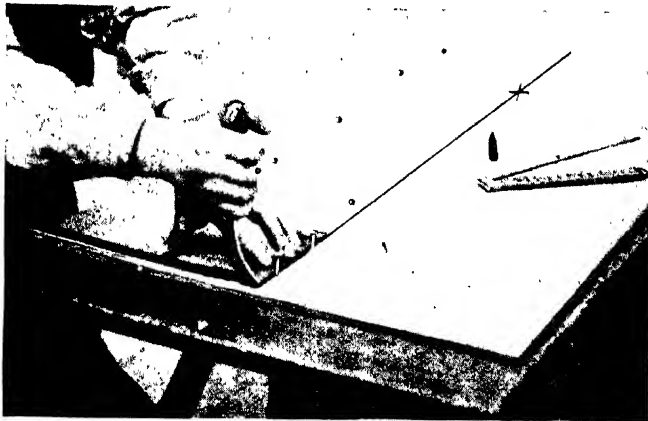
METHOD OF CUTTING BROAD BELTS
